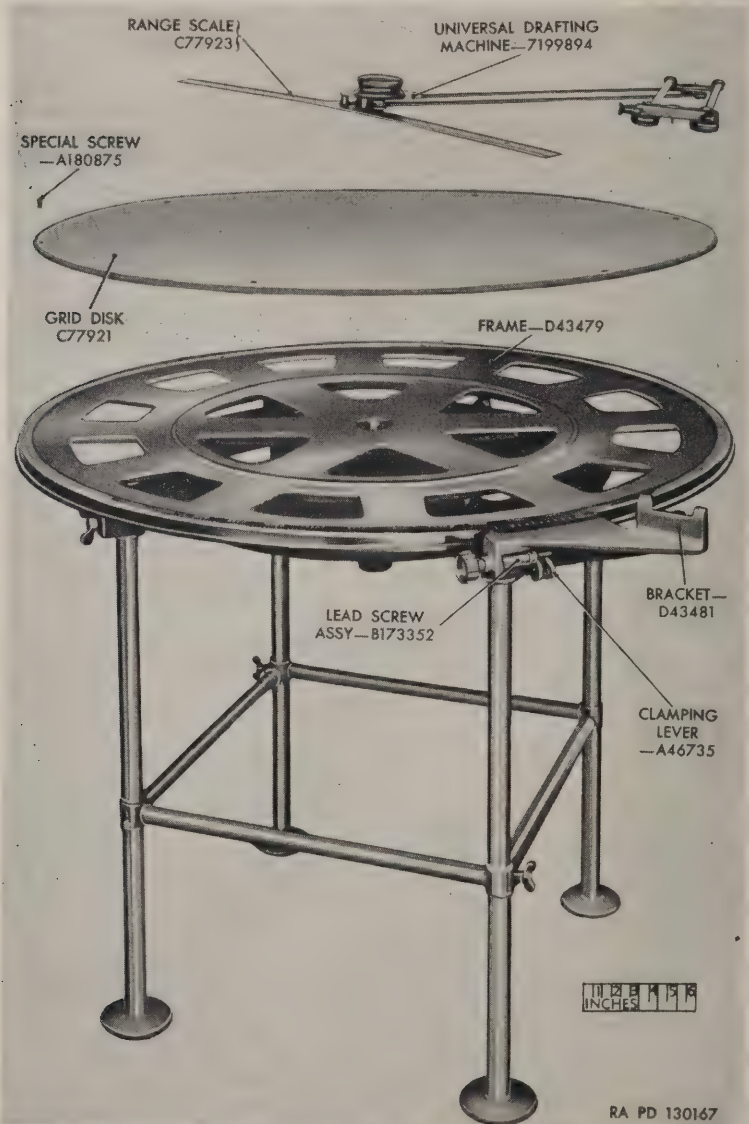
Drafting machine and grid disk removed from plotting board M5 or M5A2.
